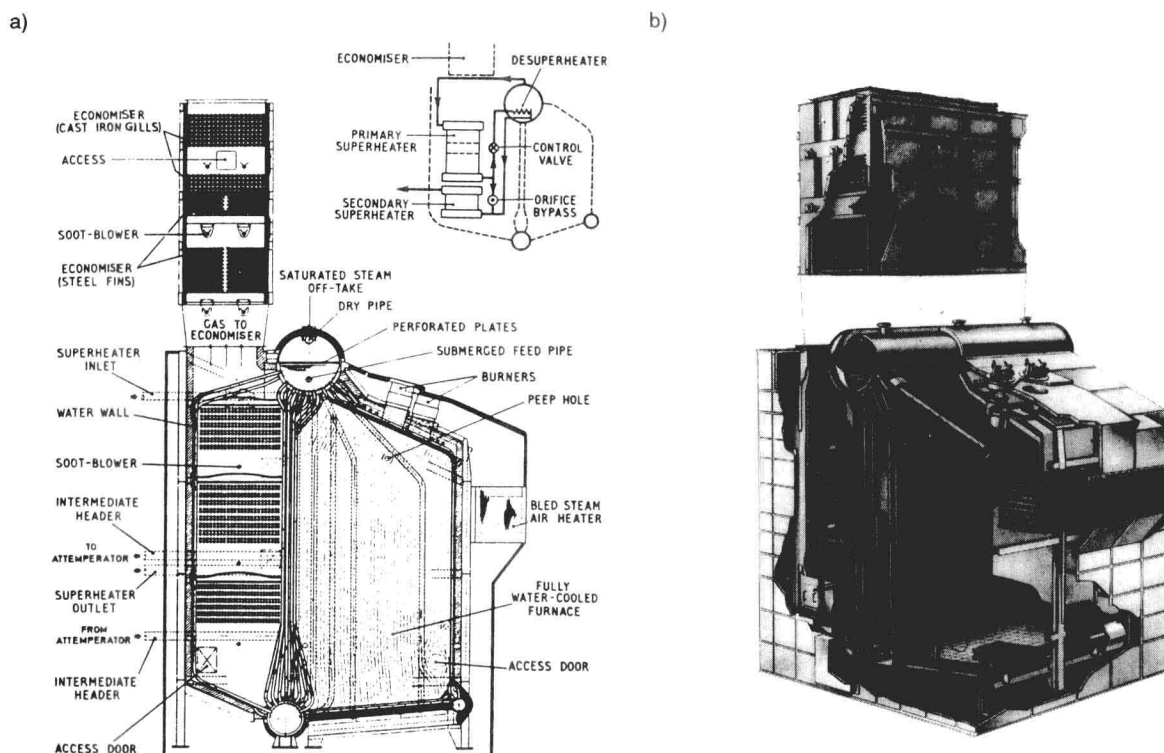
Foster Wheeler ESD III type boiler: a) sectional view; b) internal view.
